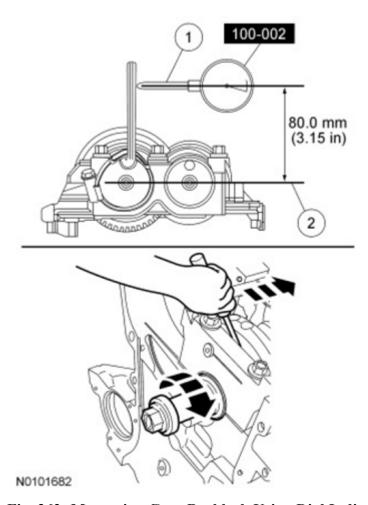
Measuring Gear Backlash Using Dial Indicator Gauge With Holding Fixture Courtesy of FORD MOTOR CO.
